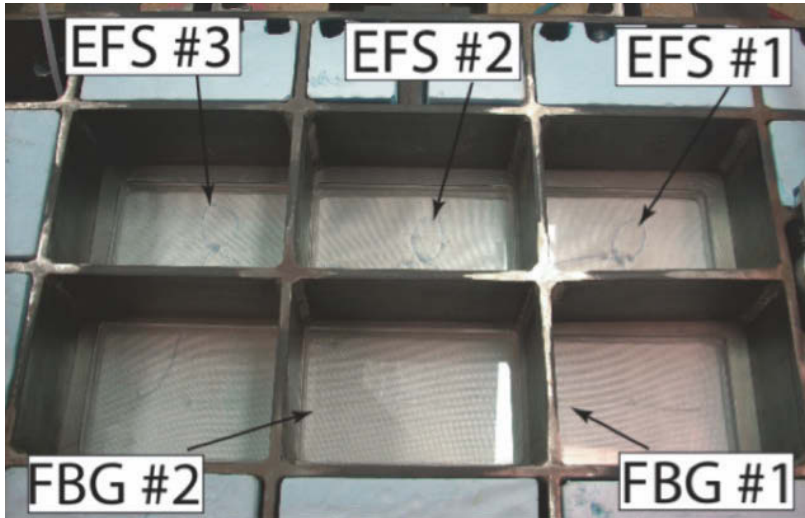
Sensors positioned in RTM prior to injection (mold closed)
